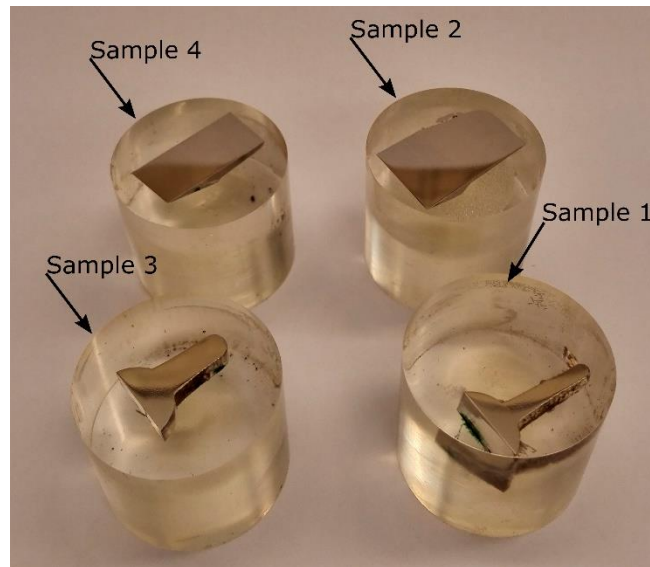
Samples 1-4 mounted in clear acrylic resin, Specifast, after grinding and polishing.
